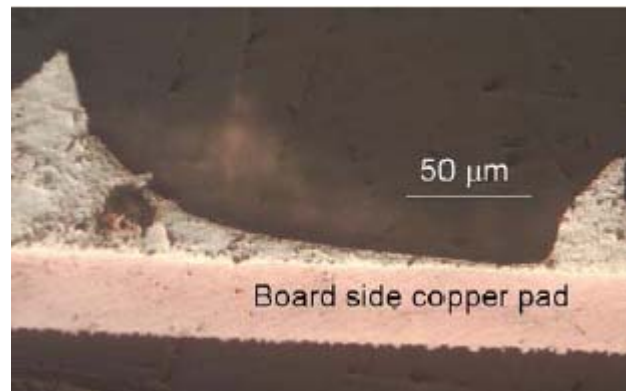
Cross-sectional view of fracture surface for QFP (Sn) - Sn3.0Ag0.5Cu solder - ImAg pad finish sample, Aged at 125C for 350 hours – Fracture site between the lead and solder interface
